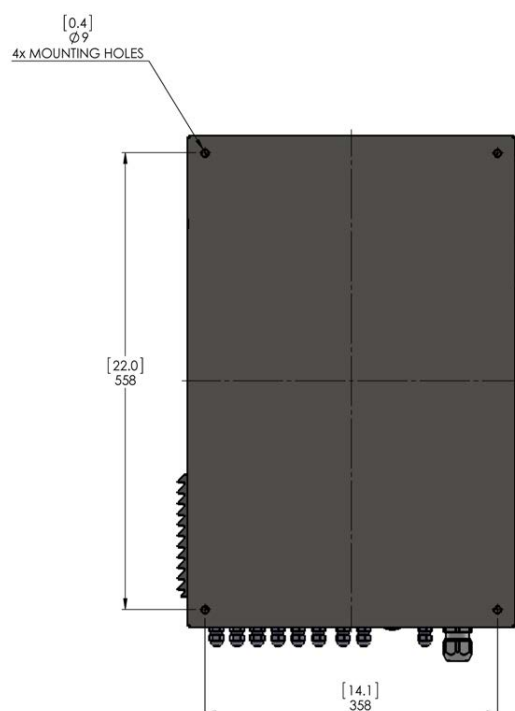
RS104 Electrical Cabinet Mounting Holes
